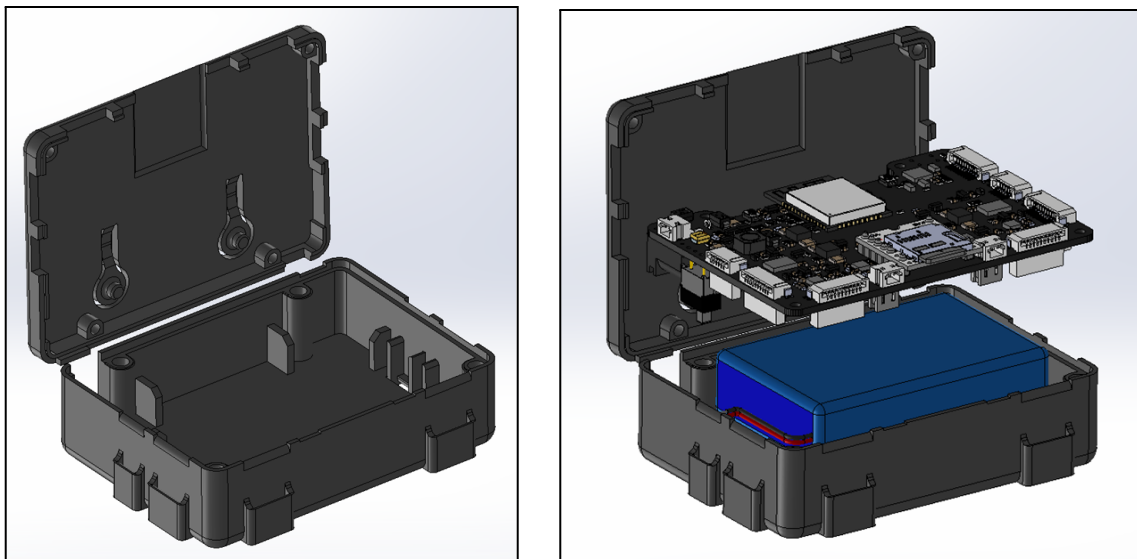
Inside view of the box for the Main board electronics, and exploded view of the Main Board assembly.
